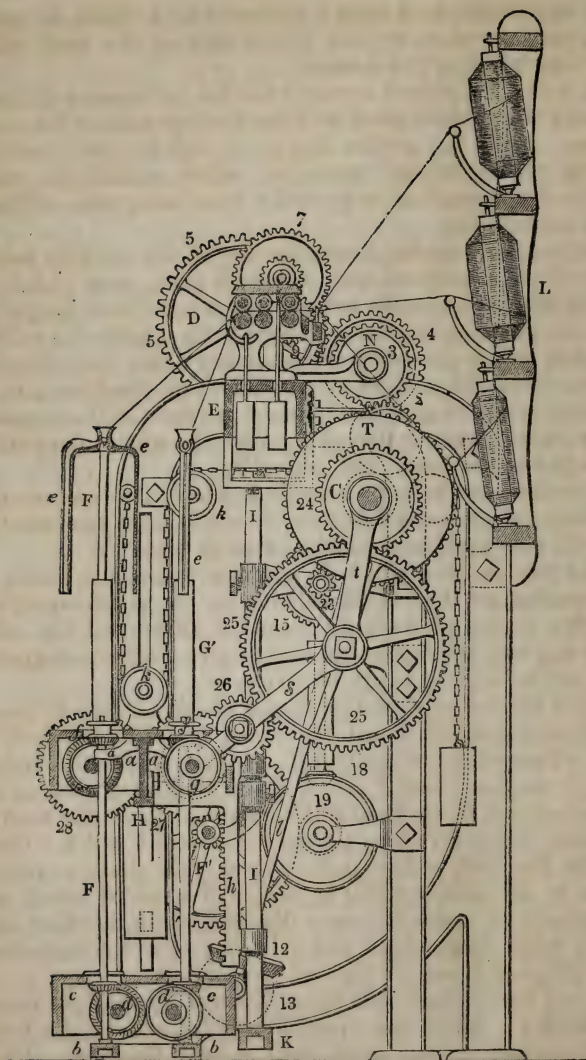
Cross Section of Bobbin-and-Fly Frame, parallel with the view in fig. 50.
